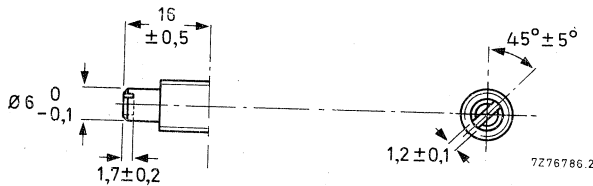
Spindle with screwdriver slot; spindle fully counter-clockwise.
